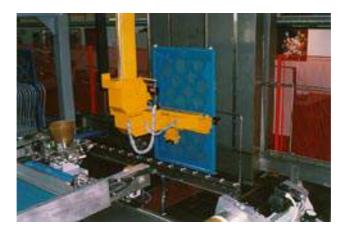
Robot lifting a flat screen from the rack prior to fitting it on the printing machine (Viero)
